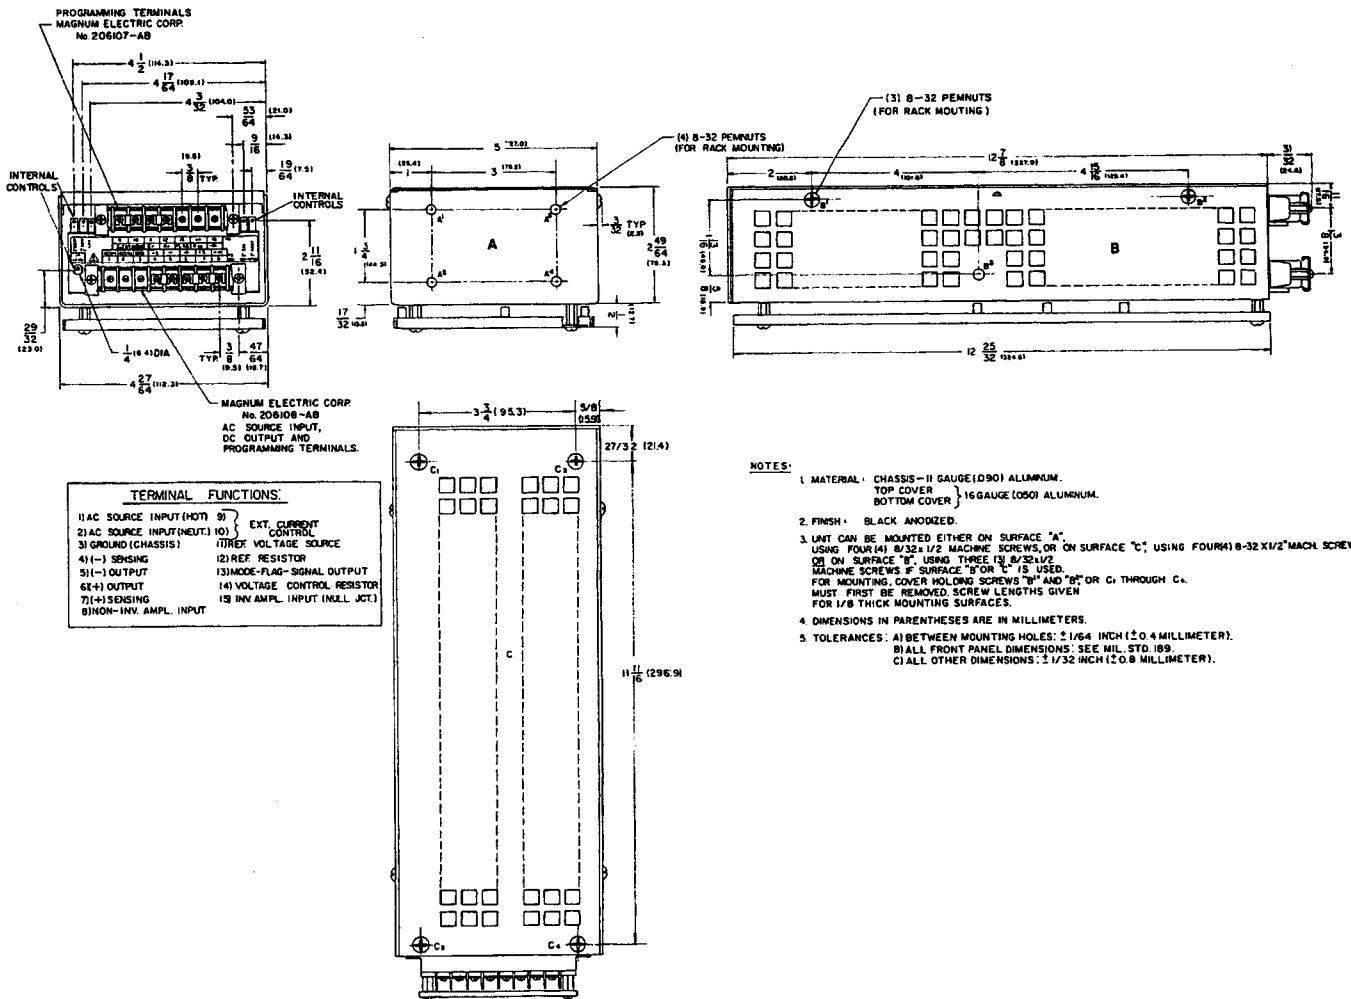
MECHANICAL OUTLINE DRAWING
